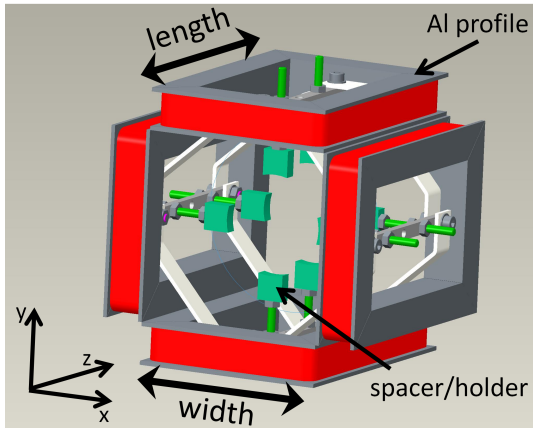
Drawing of the GunLab H/V steerer magnets.
